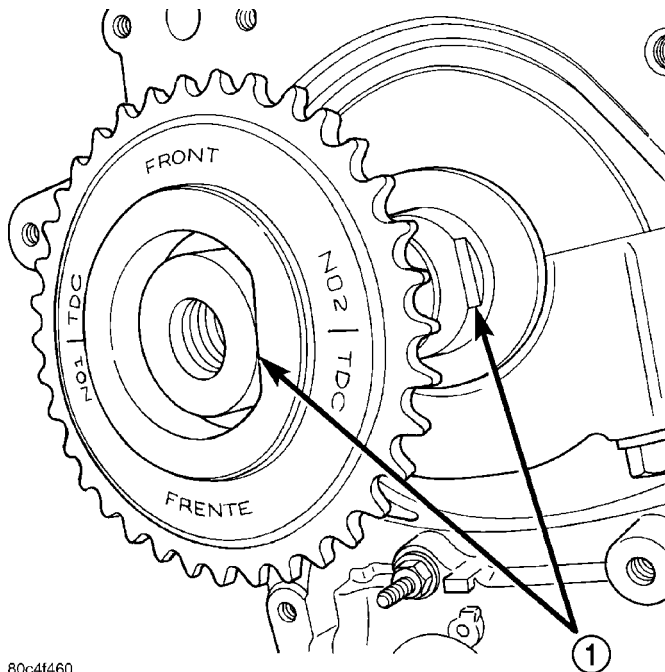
Balance Shaft Sprocket Alignment to Crankshaft
